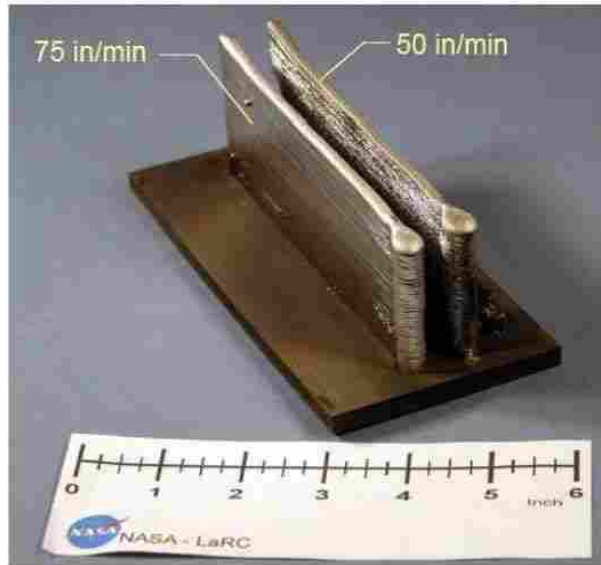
NASA Wall 1 (Left) and NASA Wall 2 (Right)
